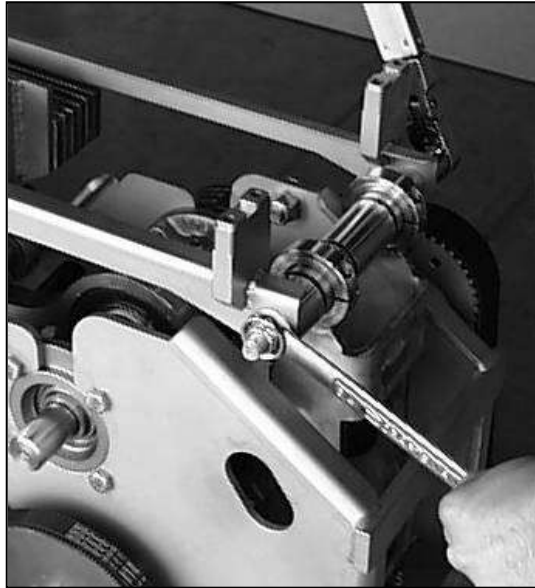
Tightening the Pan Attachment Arm Bolts
